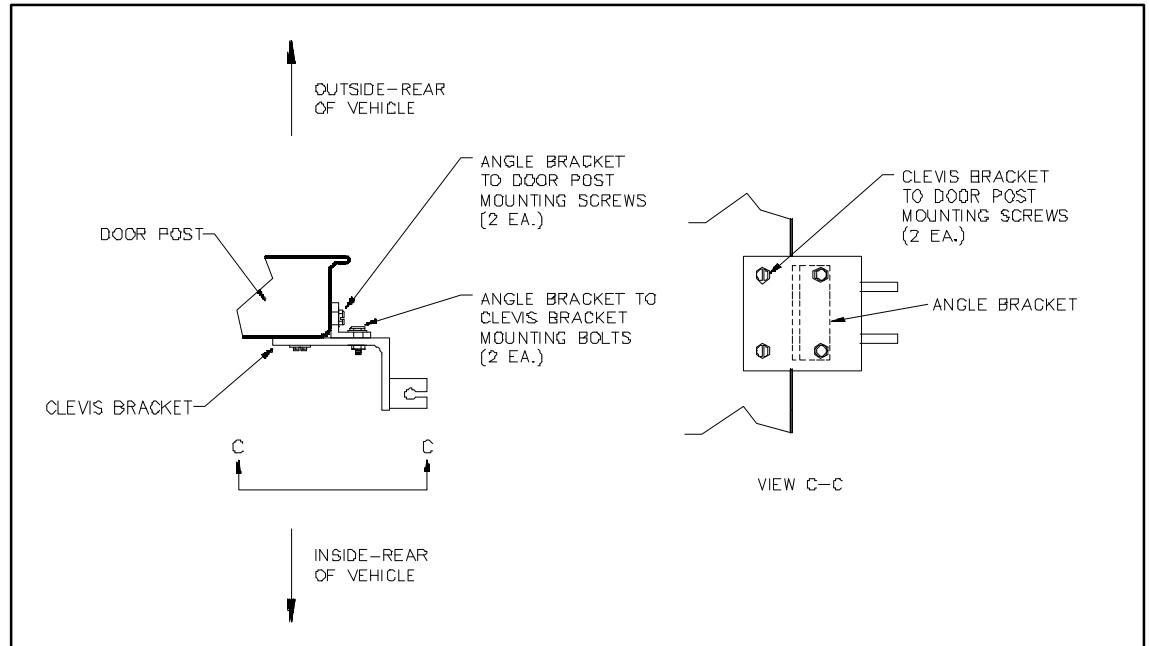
RIGHT-REAR BRACKET ASSEMBLY INSTALLATION
